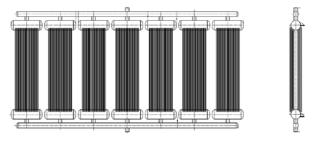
Layout Drawing of APR+ PCCS Heat exchanger (2)
